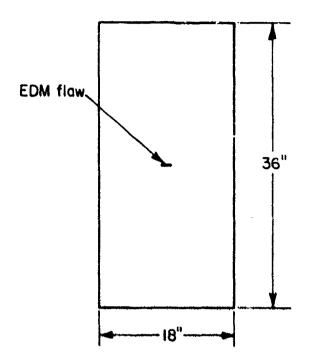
SHEET FRACTURE TOUGHNESS SPECIMEN
